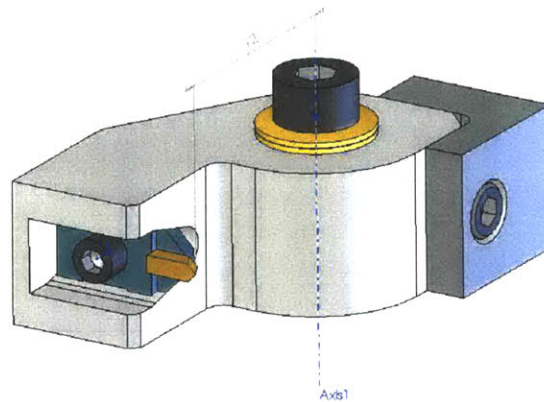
Assembly of tool holder, diamond tool and balance mass.
